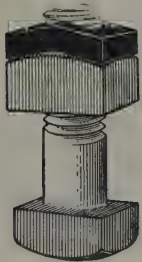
Square Toggle Lock Nut. Jones Positive Nut Lock Company.
